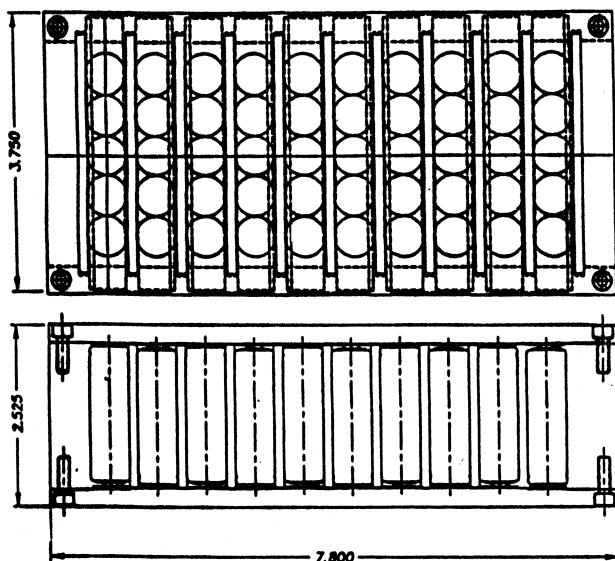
Parallel-series assembly of RAM batteries (dimensions in inches).
